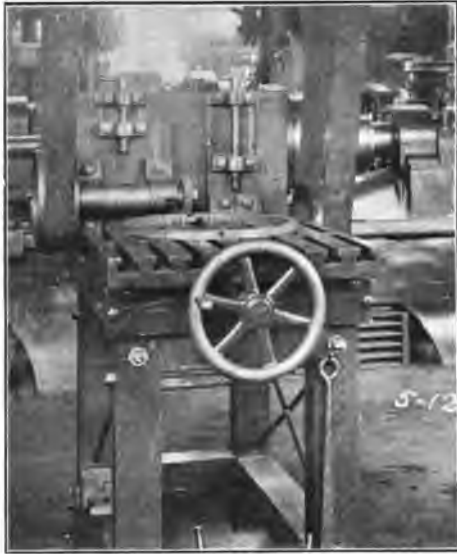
SNAP RING MILLING MACHINE DESIGNED BY A MACHINE FOREMAN AND BUILT LARGELY FROM PARTS OF OLD MACHINERY. TIME FOR MACHINING ONE RING, 35 SECONDS.
